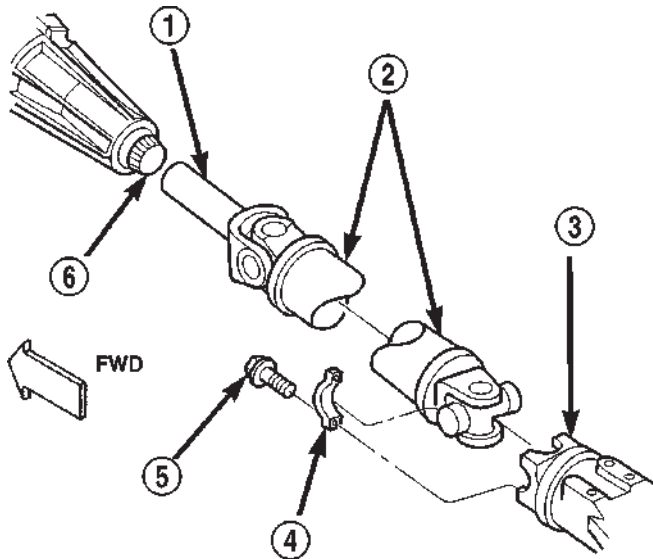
Rear Propeller Shaft with Center Bearing
